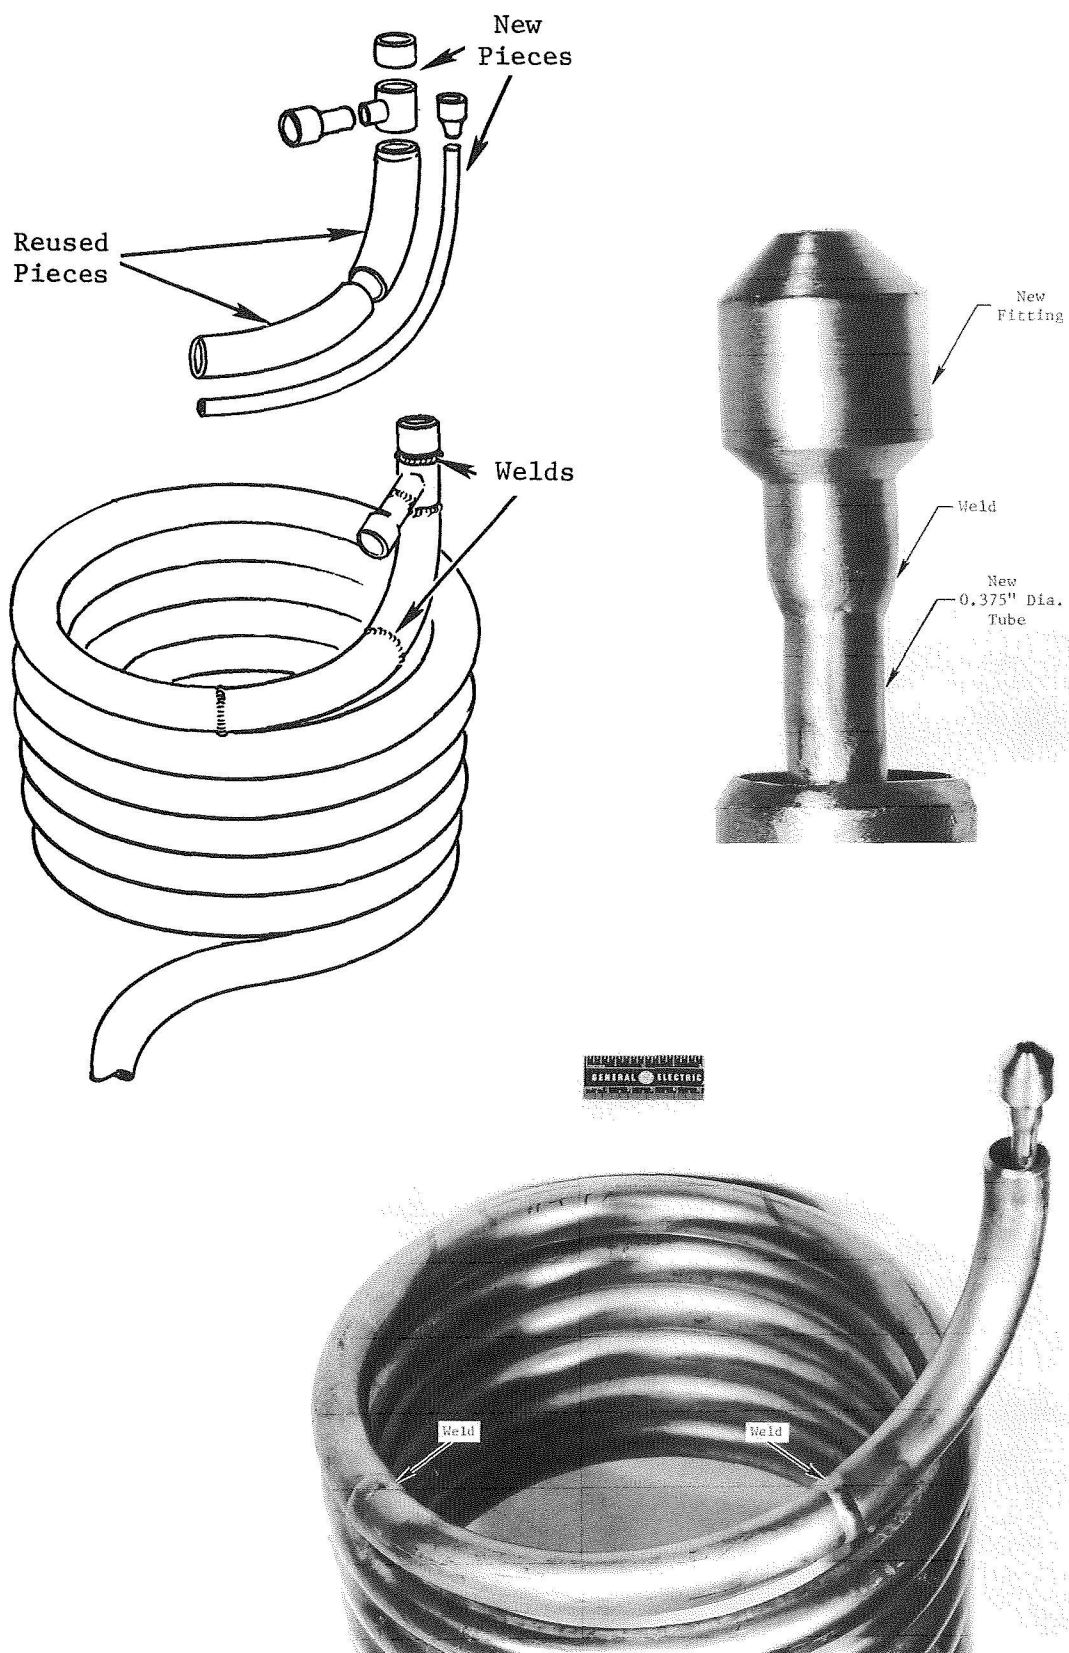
Top of the T-111 Boiler Following Initial Repair Welds.
